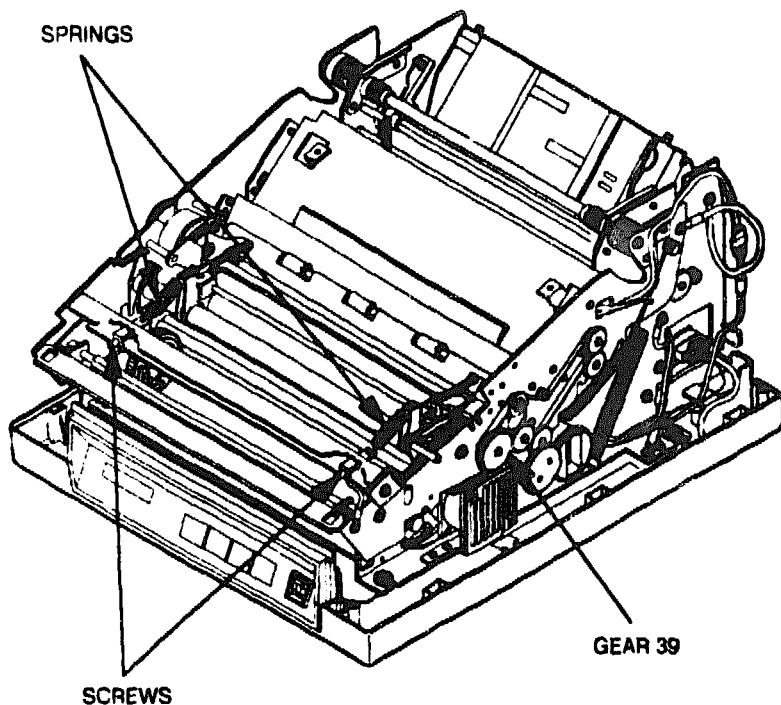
Upper Unit Tension Stay Screws and Springs
